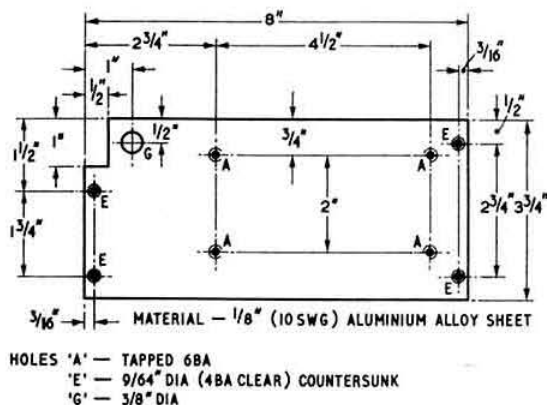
Front panel drilling diagram: Aluminium sheet, 1/8 in. thick is recommended.
